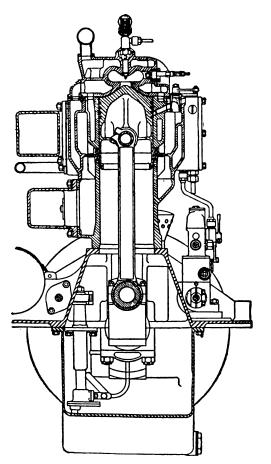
Tartrais-Peugeot Diesel Engine.
